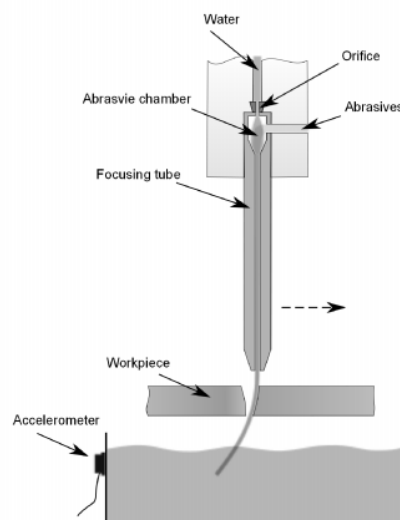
Waterjet nozzle, work piece and catcher tank with sensor
